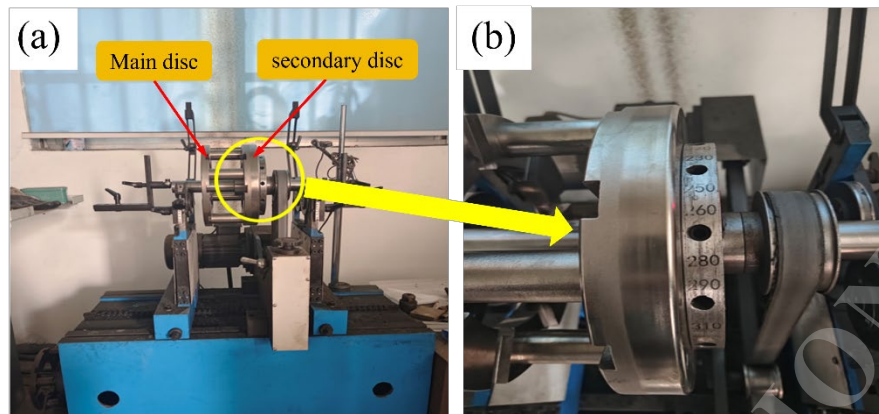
(a) Conduct imbalance detection on the impeller body using a dynamic balancing machine; (b) Utilize an angle indicator on the dynamic balancing machine.
